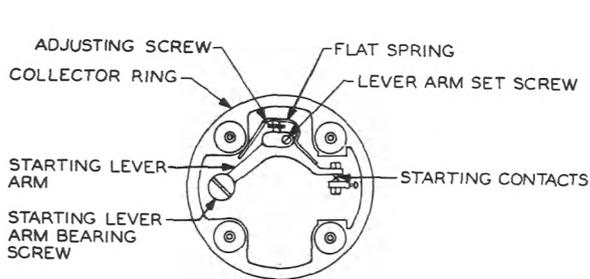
Speed Regulator Starting Contacts (Motor Side or Rear View)
